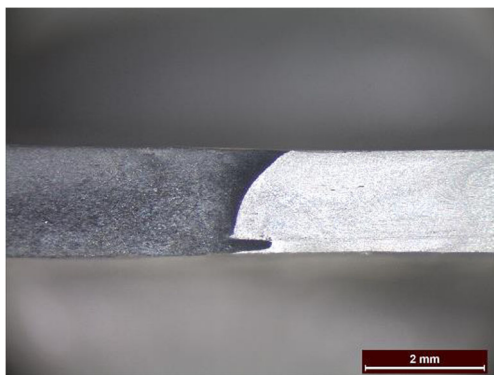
Optical macrograph of the weld nugget of the 600 RPM specimen
